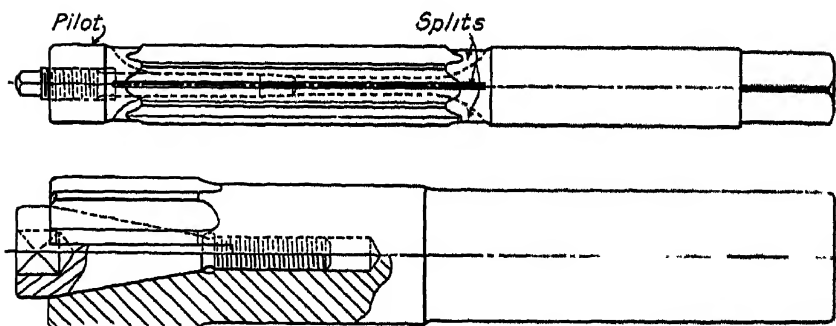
HAND REAMER EXPANDED BY PLUG, AND MACHINE REAMER EXPANDED AT END
